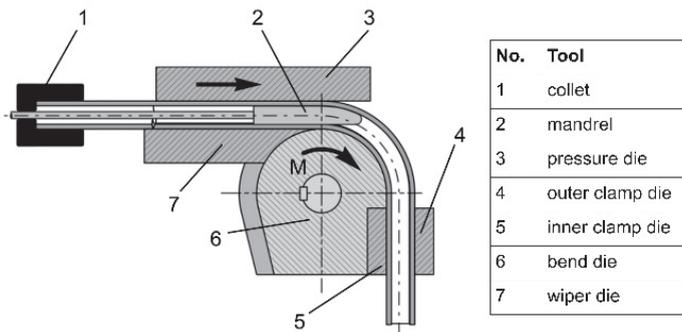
Tool setting of a rotary draw bending process [VDI3430]
